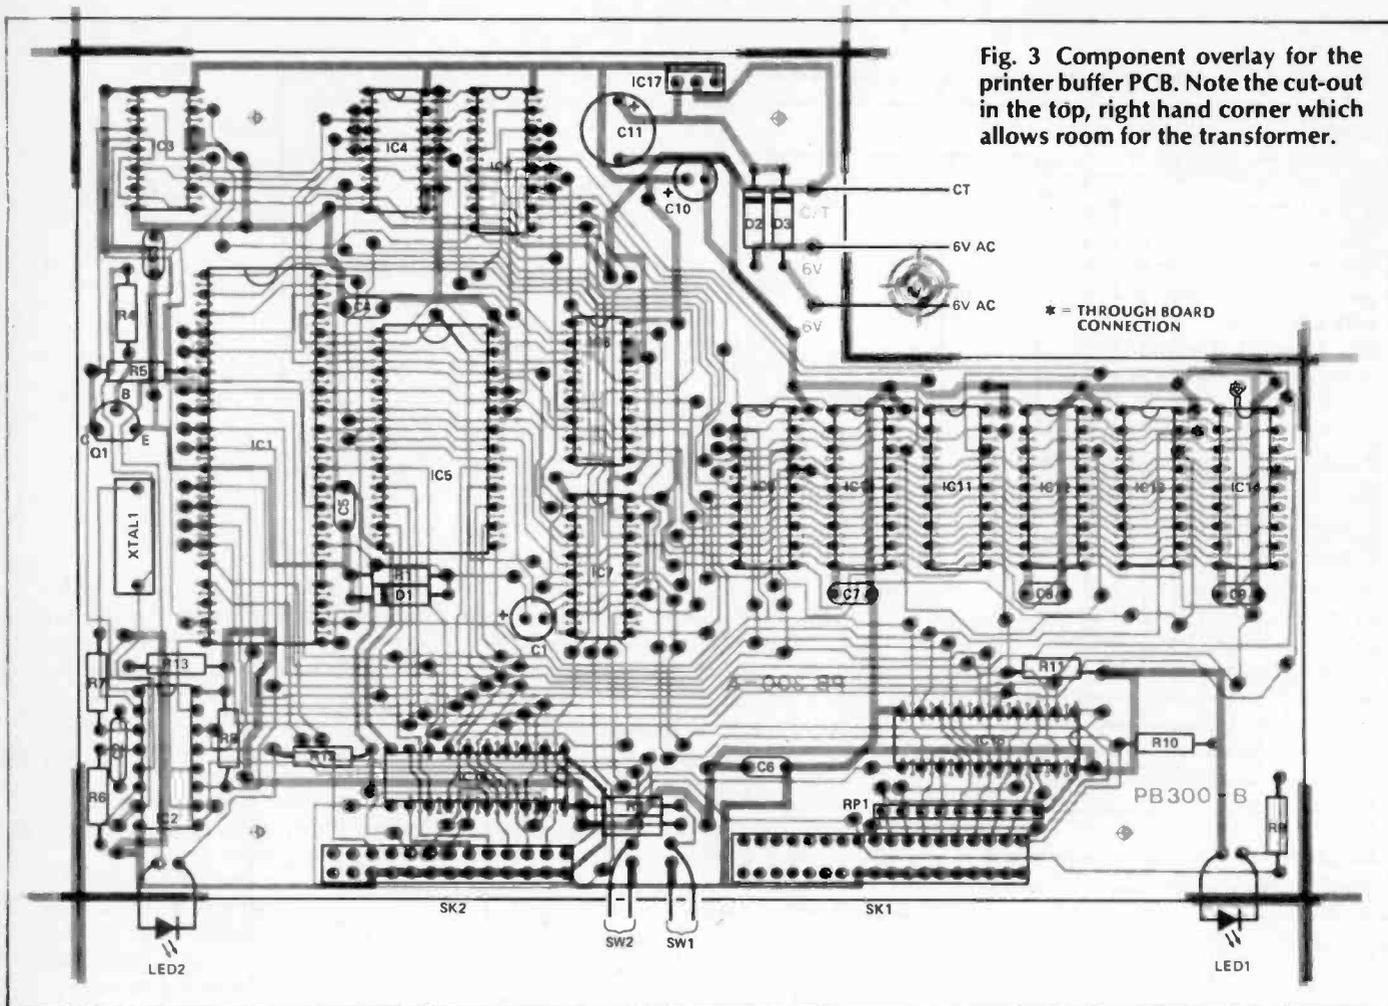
Component overlay for the printer buffer PCB. Note the cut-out in the top, right hand corner which allows room for the transformer.
